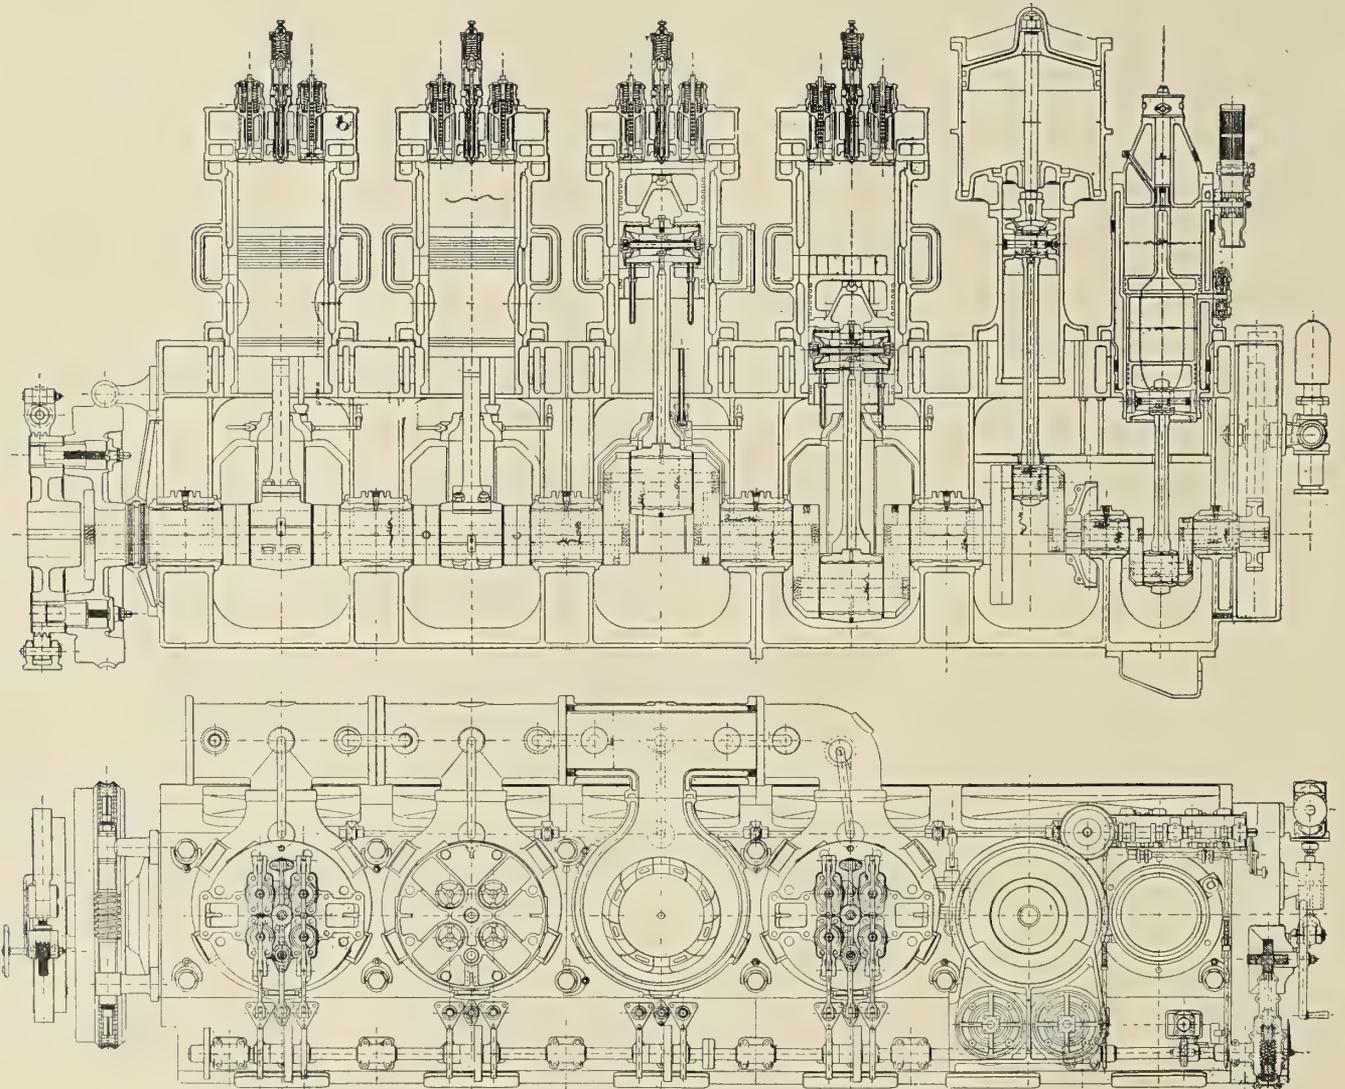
900 SHAFT HORSEPOWER SCHNEIDER-DIESEL ENGINE FOR THE FRANCE
